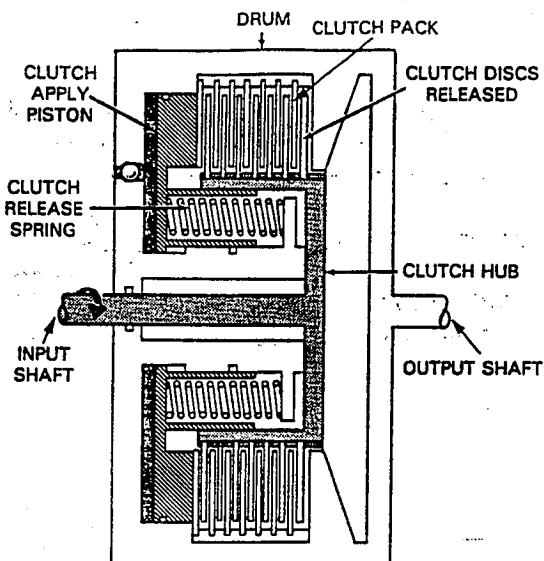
Multiple disc clutch schematic. Note that hydraulic pressure is not acting on the clutch apply piston. With no oil pressure, clutch release springs separate clutch discs. Clutch hub turns but cannot drive output shaft—drum assembly. (GM)
